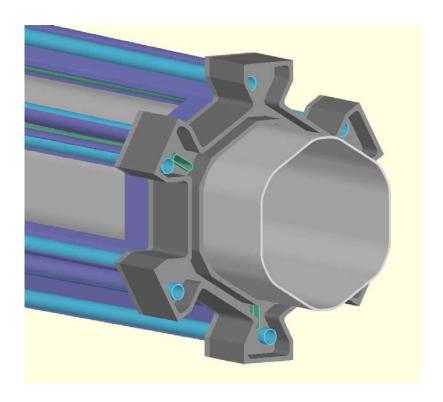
Outer bulkhead showing one of the cooling manifolds exposed.
